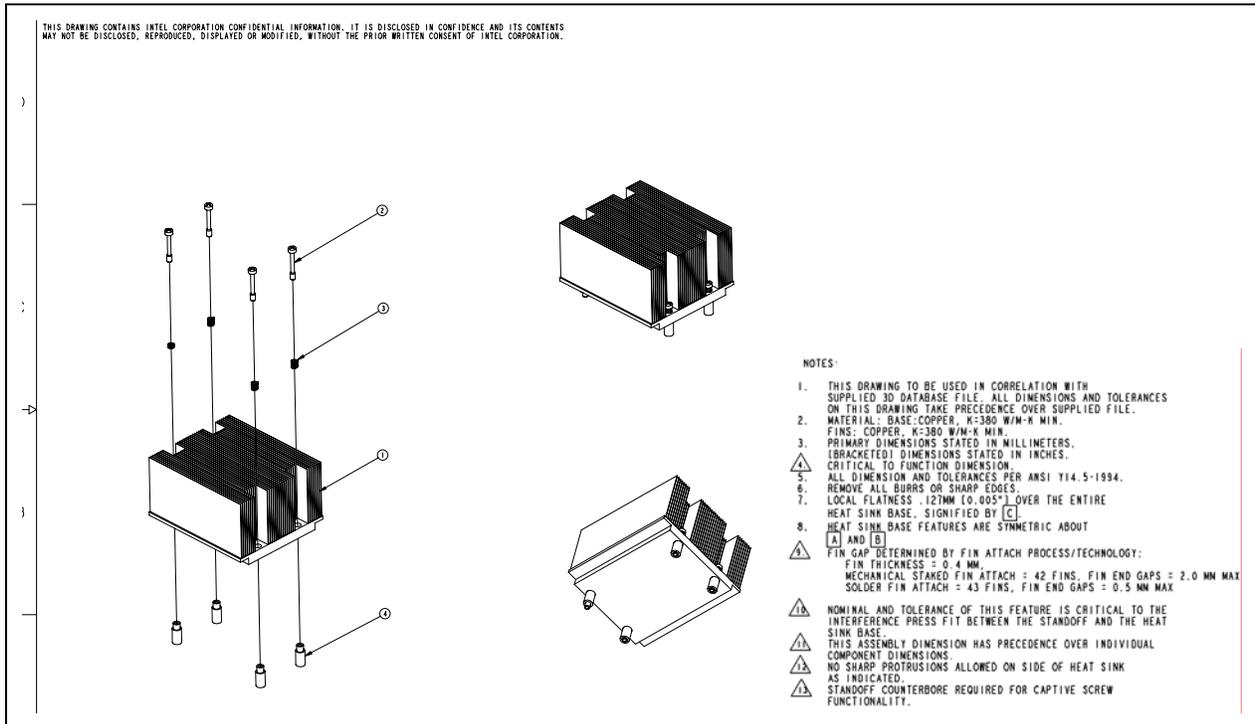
2U Cooling Solution Heatsink (Sheet 2 of 4)
